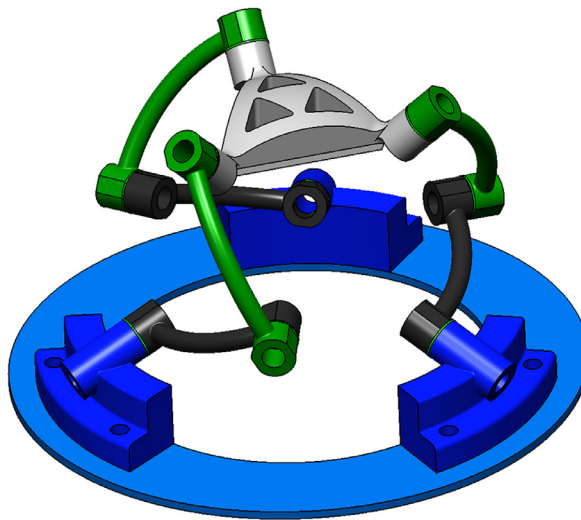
CAD model of SPRM 3-RRR-type (Robot-2).
